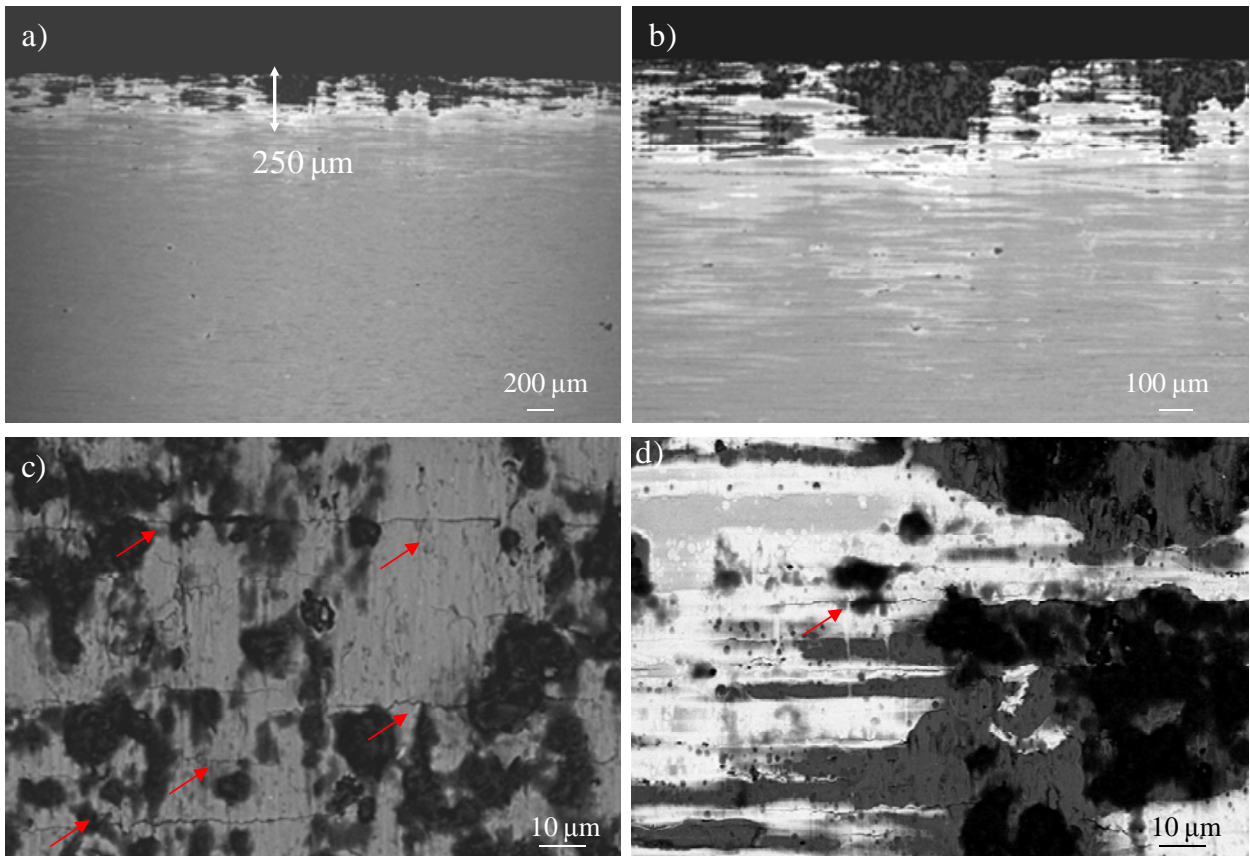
Fractography of the HWS punch coated with W:C-H; flank face after 5000 strokes
